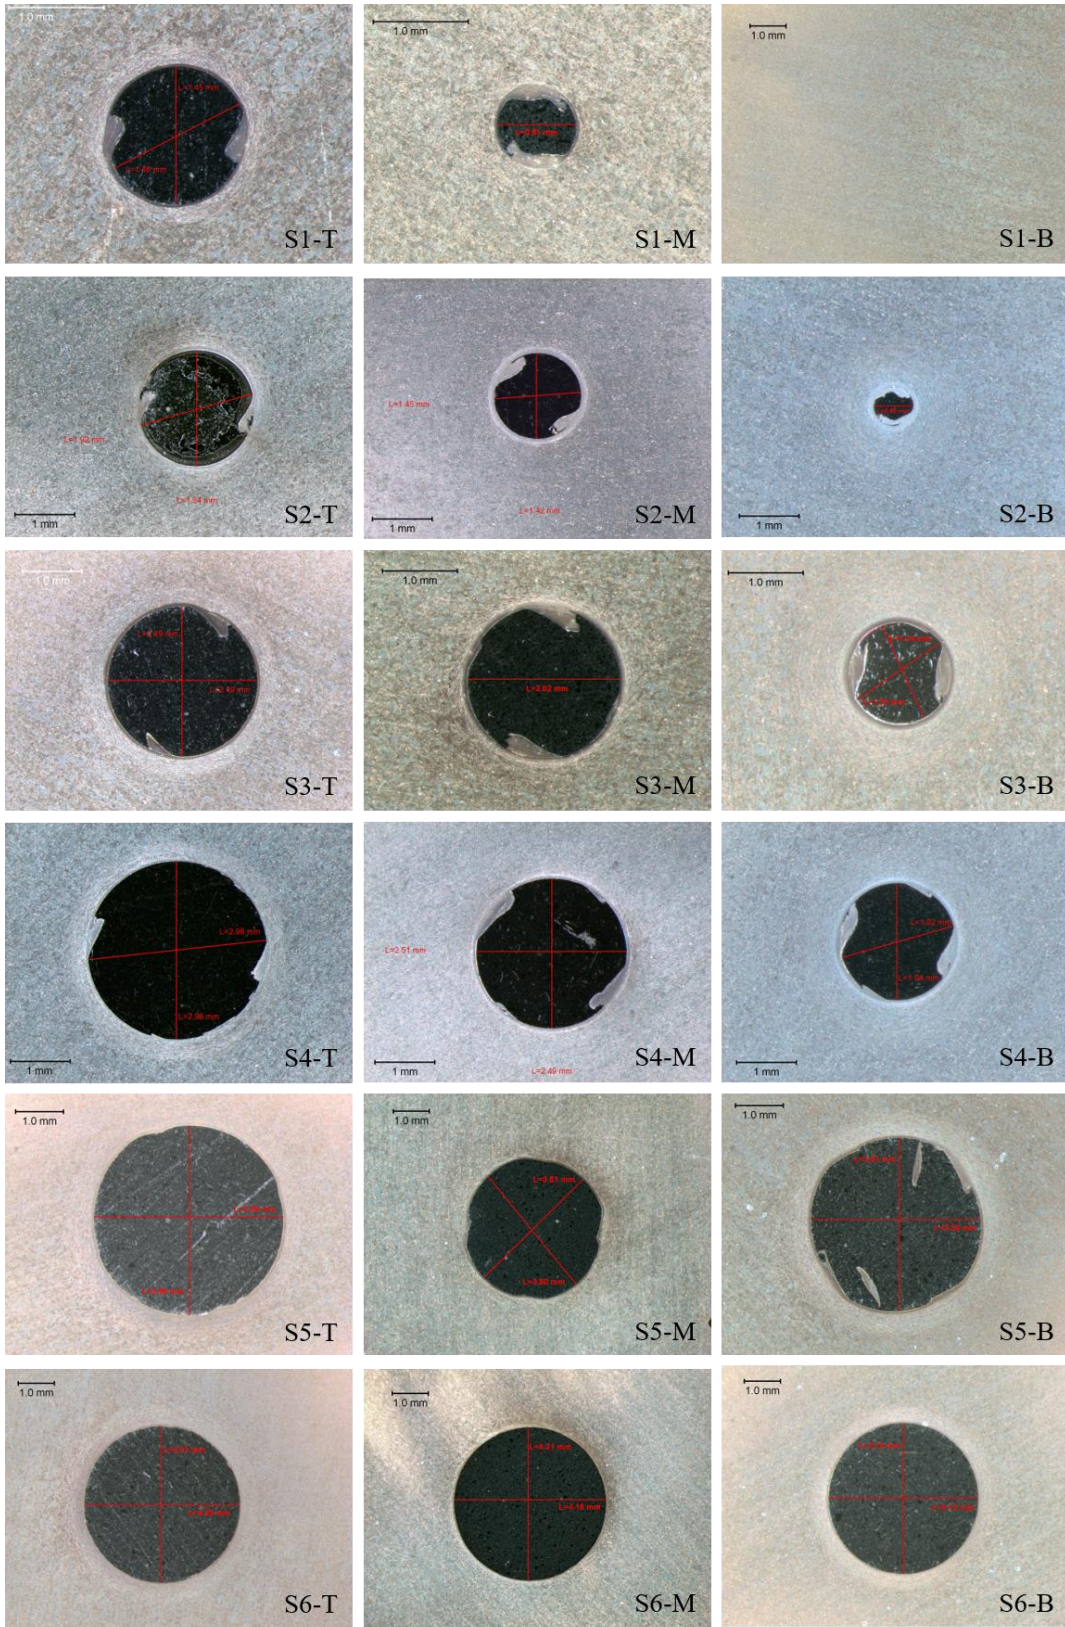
Stepped samples at top (T), middle (M), and bottom (B) workpiece thickness locations
